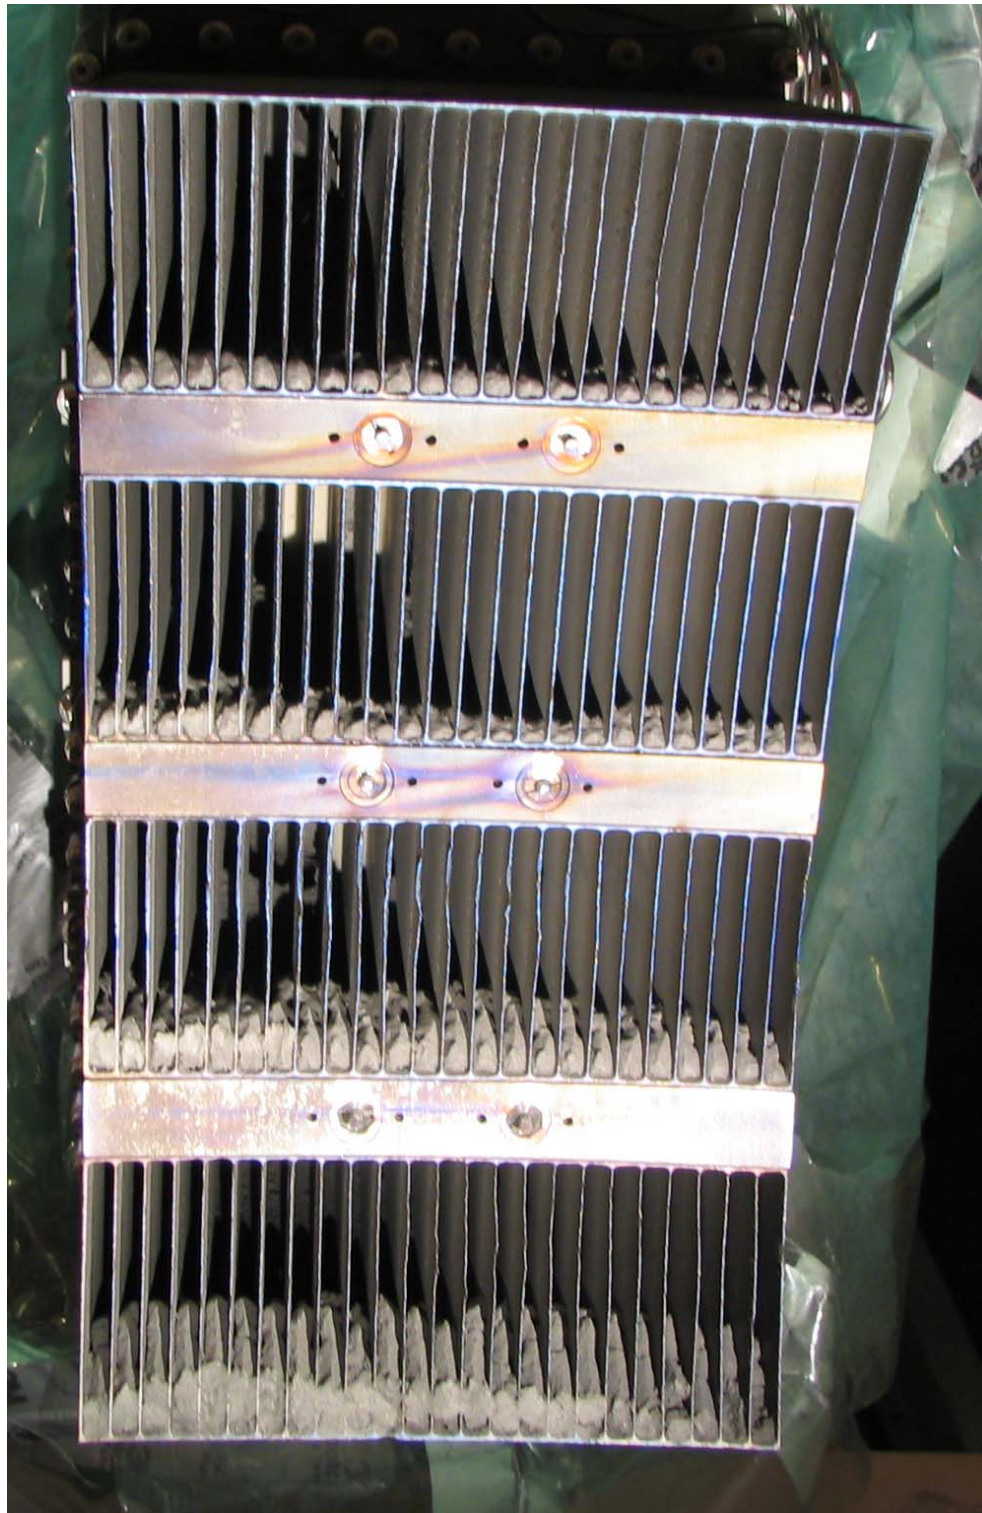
Front view shows debris extending well into guides. Erosion of the septum between guides clearly shown.
